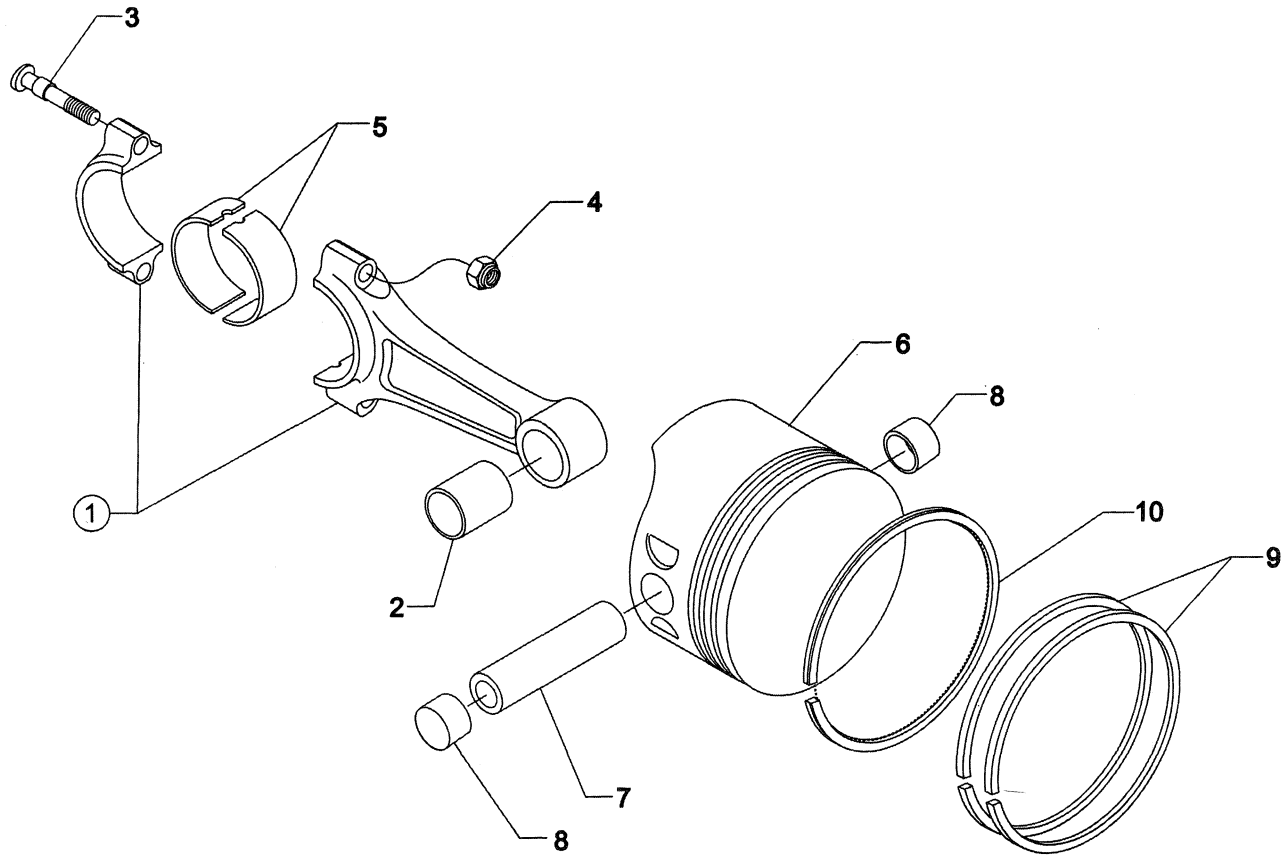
CONNECTING RODS, PISTONS AND RING ASSEMBLIES
